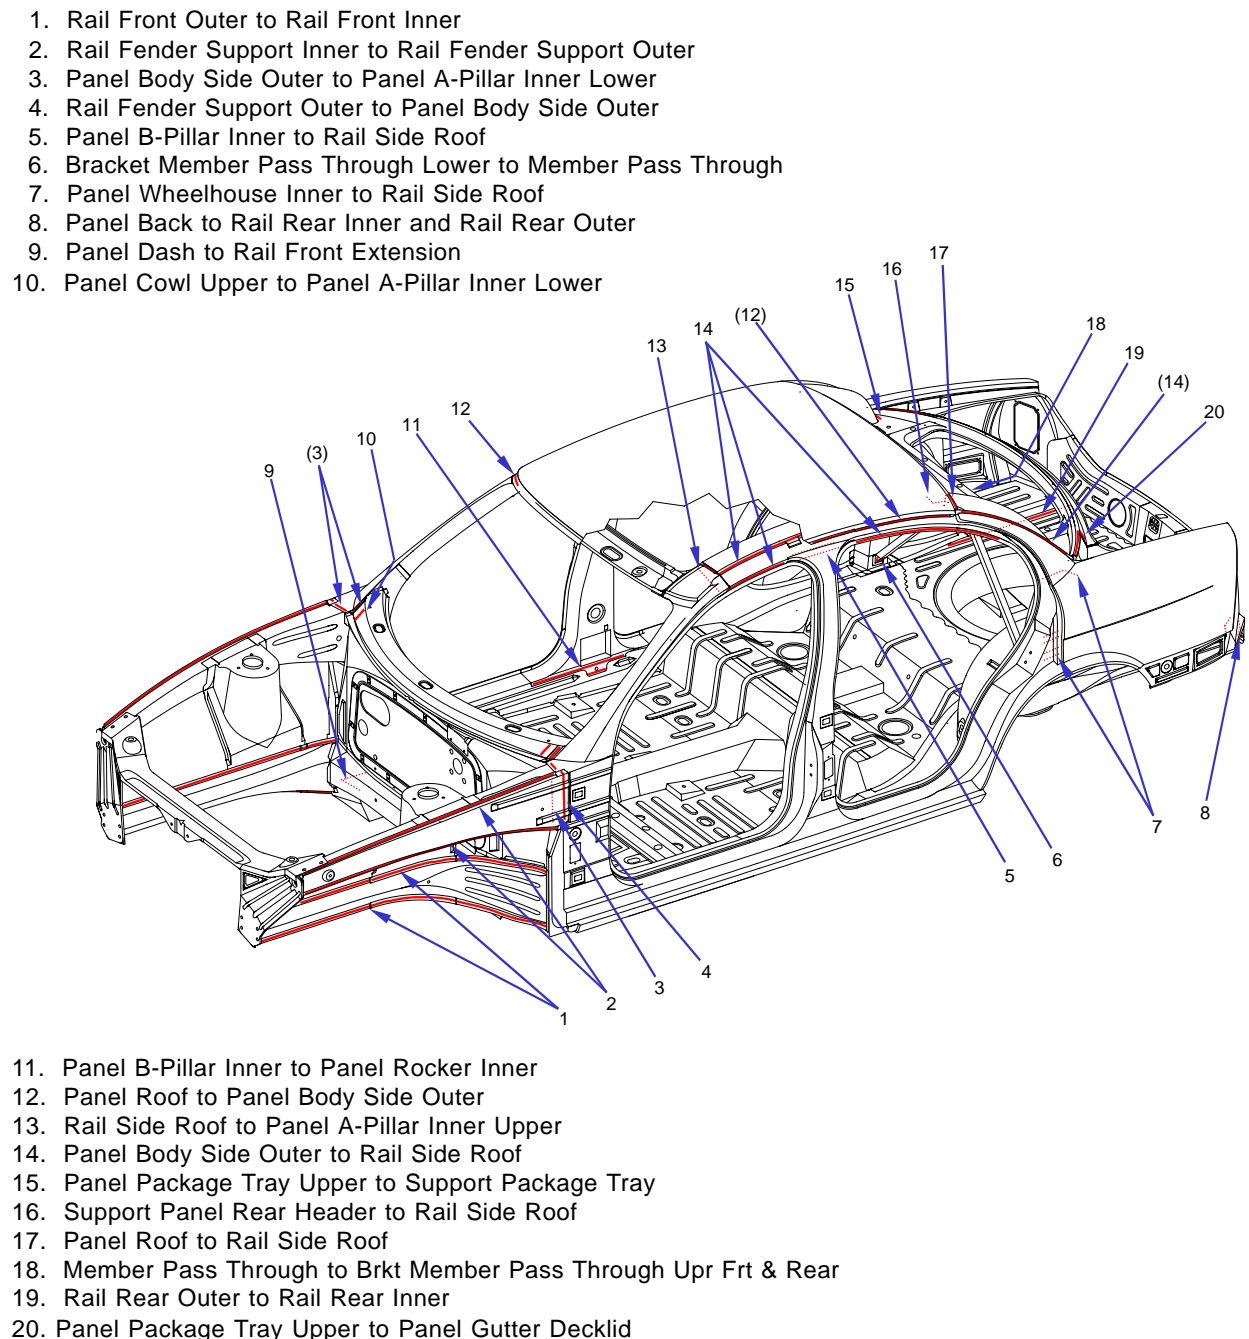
Laser Welding on ULSAB Demonstration Hardware
